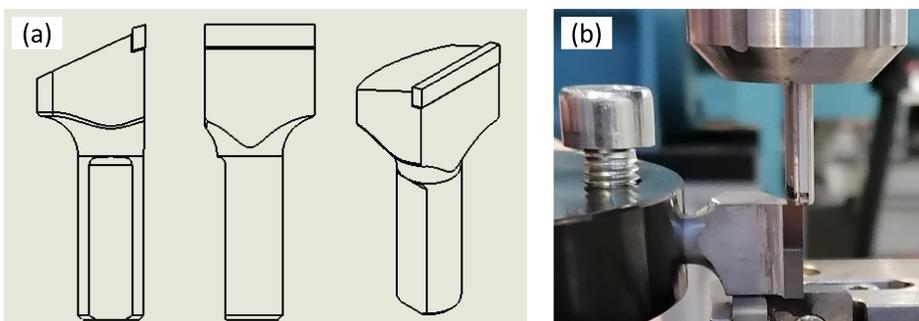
Real joint specimen geometry (a) and shear testing setup (b).
